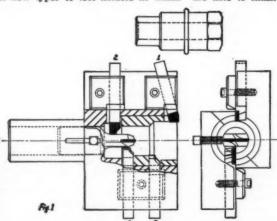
Special tool holder for producing water boiler fittings, using four % " square style No. 1 standard tool bits and a 1" masonry drill.
